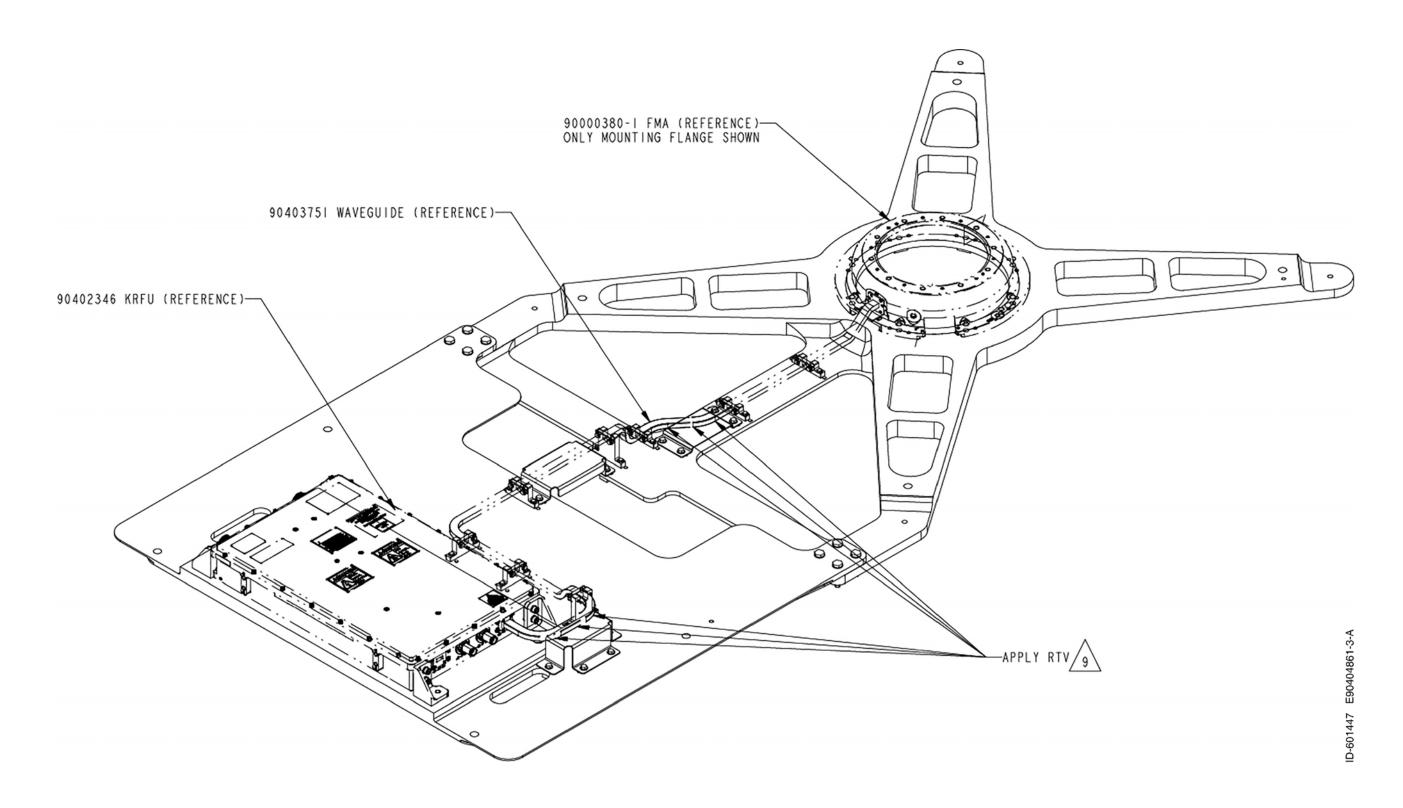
(Sheet 3 of 4) LAIM Outline and Installation Drawing (90404861, REV A)
